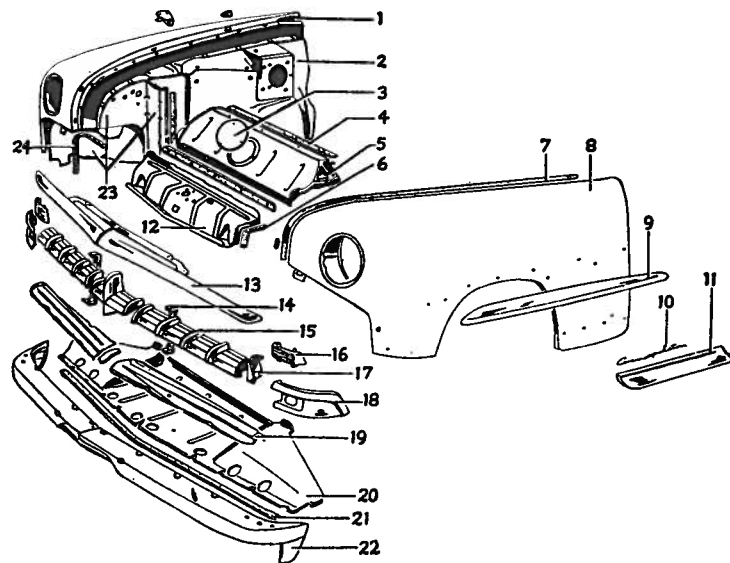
Grille and Front End Sheet Metal—All Models—1950
